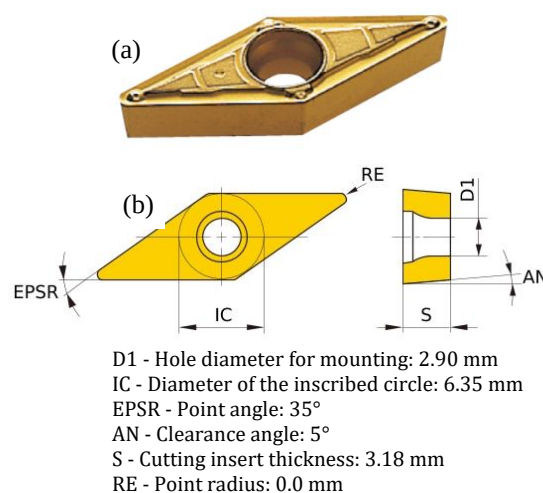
Cutting Insert: (a) VBMT 110304 – MV UE6020; (b) representation of cutting insert with its respective dimensions.
